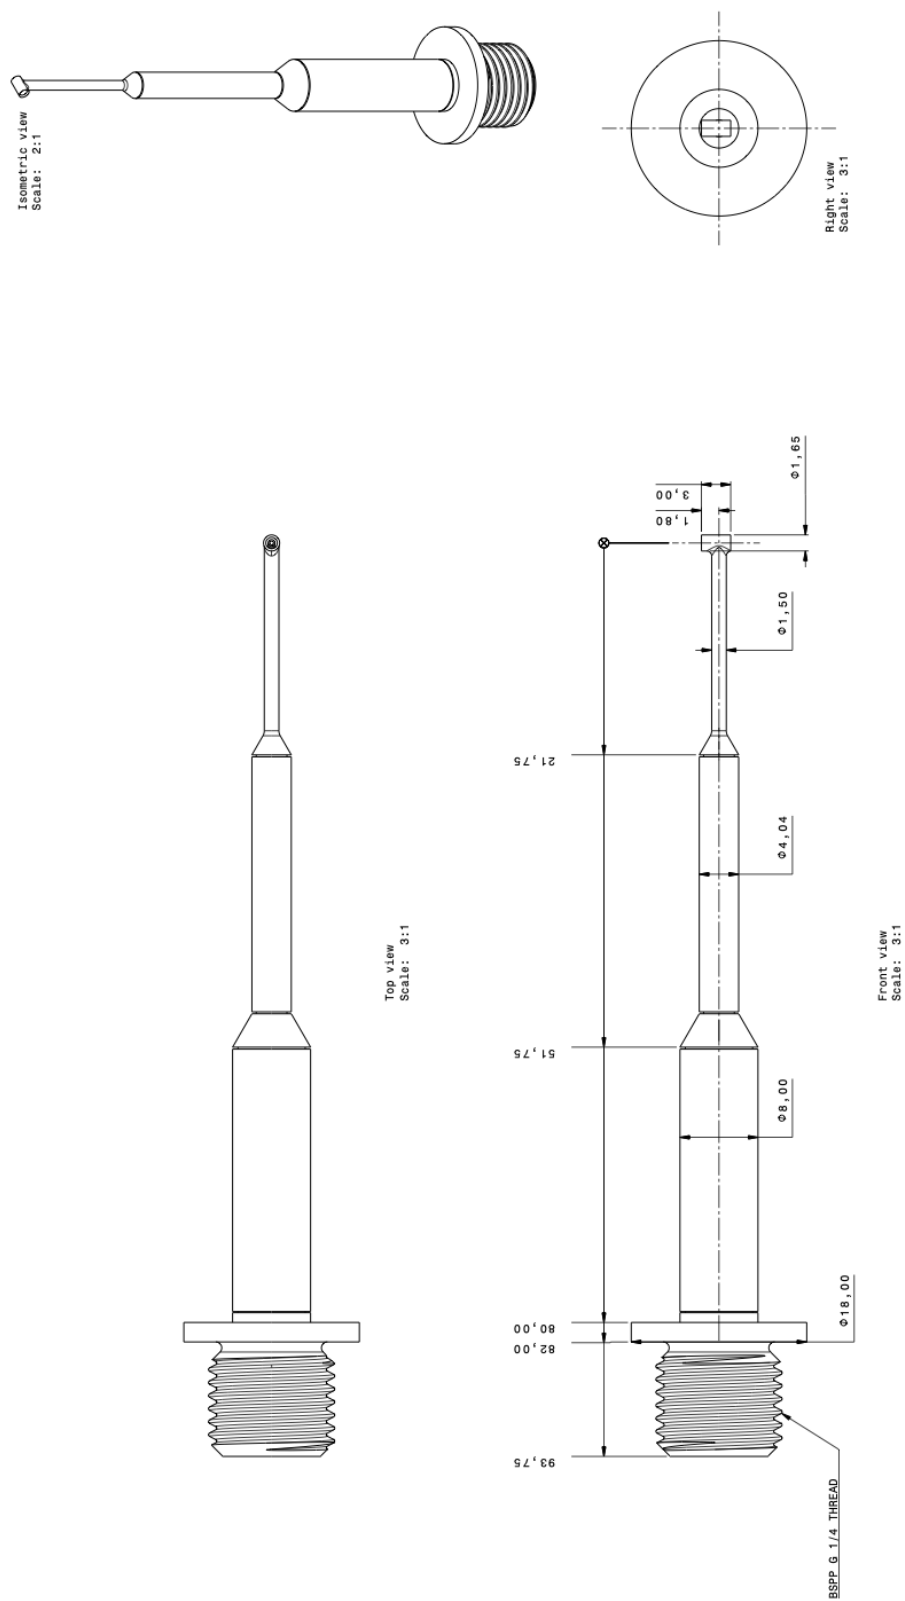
Technical drawing of the selected miniaturized Kiel probe [40], showing the probe head geometry and stem dimensions.
